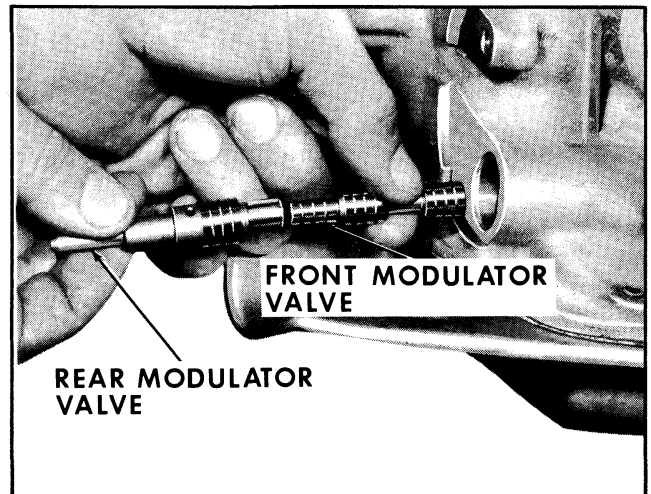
B-38 Removing Vacuum Modulator Valve Assembly
